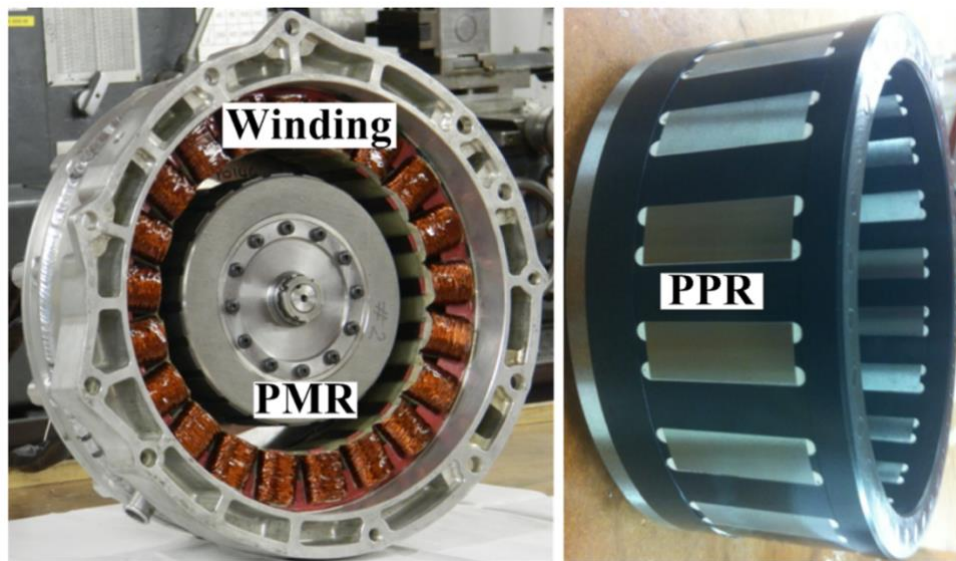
Prototype of the proposed device with removed pole piece rotor (PPR) and highlighted stator winding and the magnet rotor (PMR)
